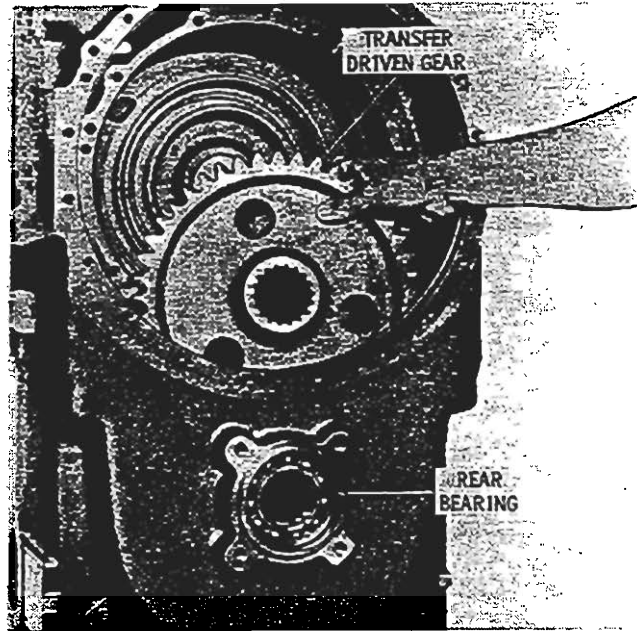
REMOVING TRANSFER DRIVEN GEAR (ONE-PIECE SHAFT)
